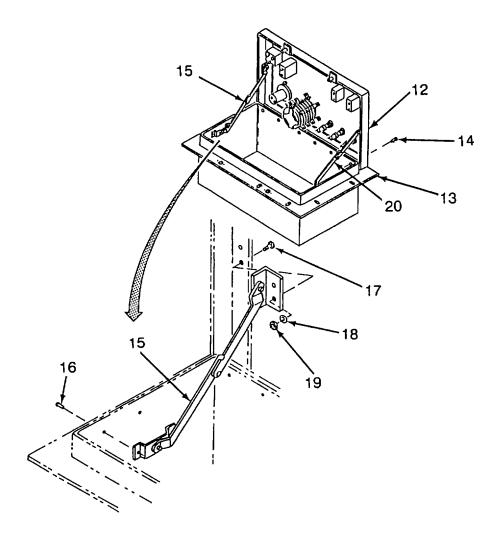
Control Box Assembly (Sheet 2 of 2)
